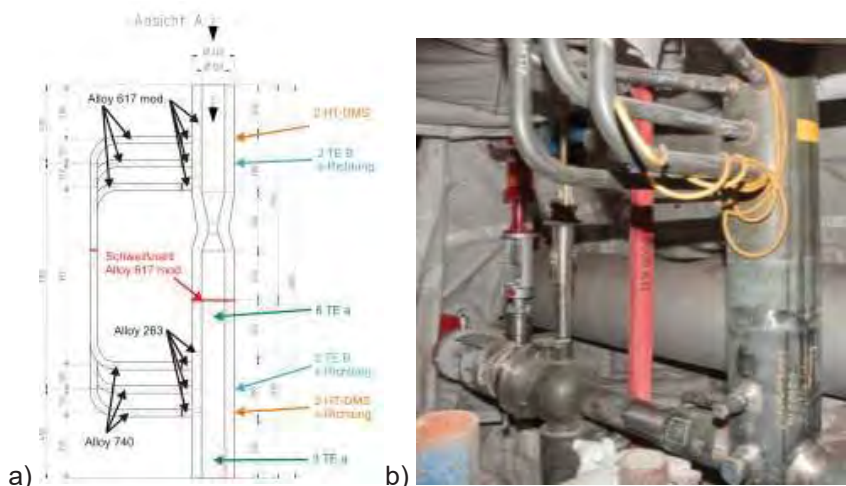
a) Technical drawing of the header, b) Installation of the header in the test loop
